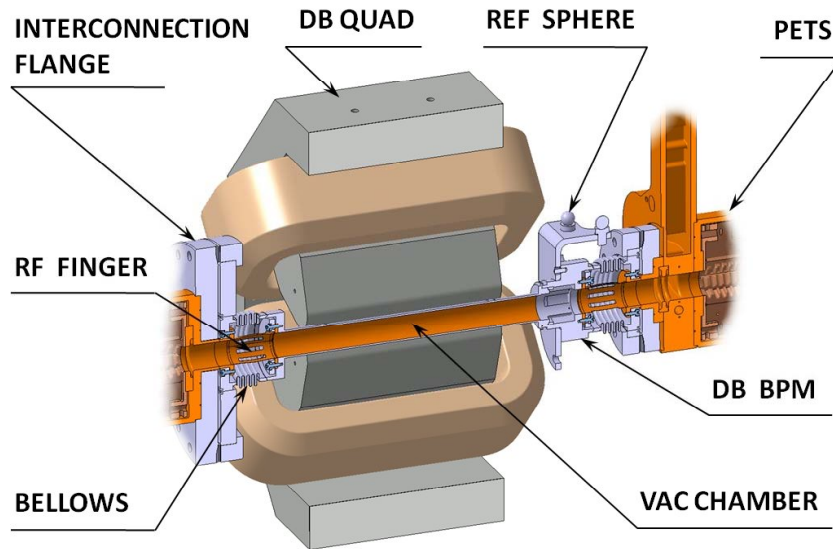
3D view of the MBQ prototype with BPM, PETS, vacuum chamber, and other ancillary components
